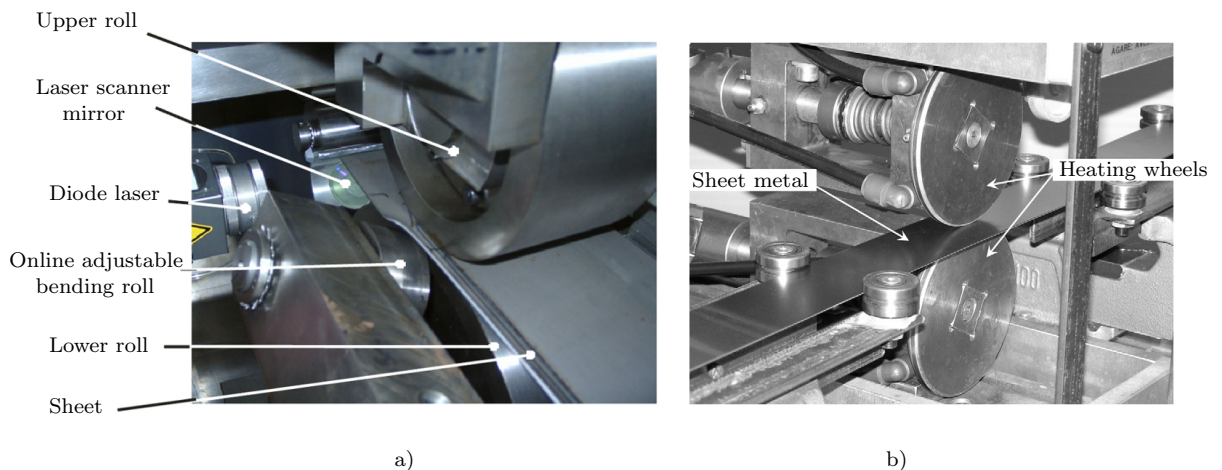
Heat assisted roll forming lines: (a) Chair of Manufacturing Technology of the University of Erlanger-Nuremberg [Pit04] and (b) Dalarna University [Lin09b].
